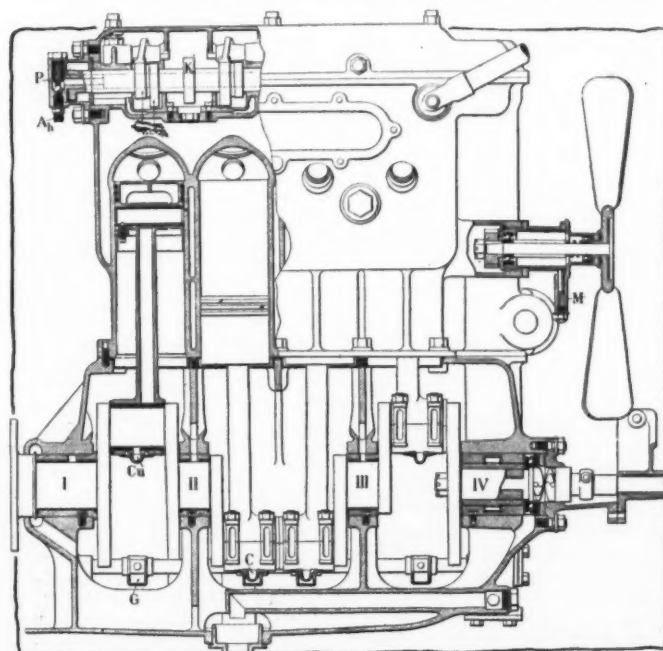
Hispano-Suiza motor; I, II, III, IV, crankshaft bearings; G, oil troughs; P, oil chamber for camshaft; Ah, oil tube attachment; M, lever for turning off the fan
